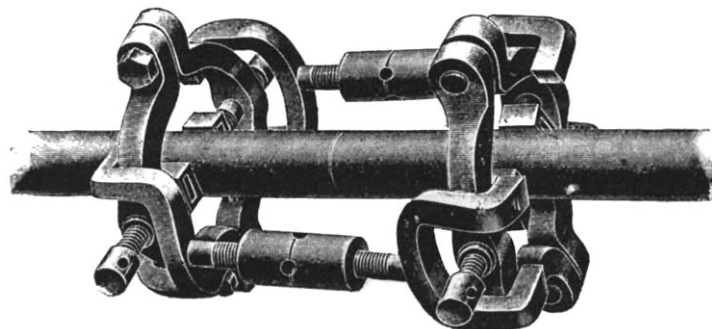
The clamps used for welding tubes up to four inches in diameter.
